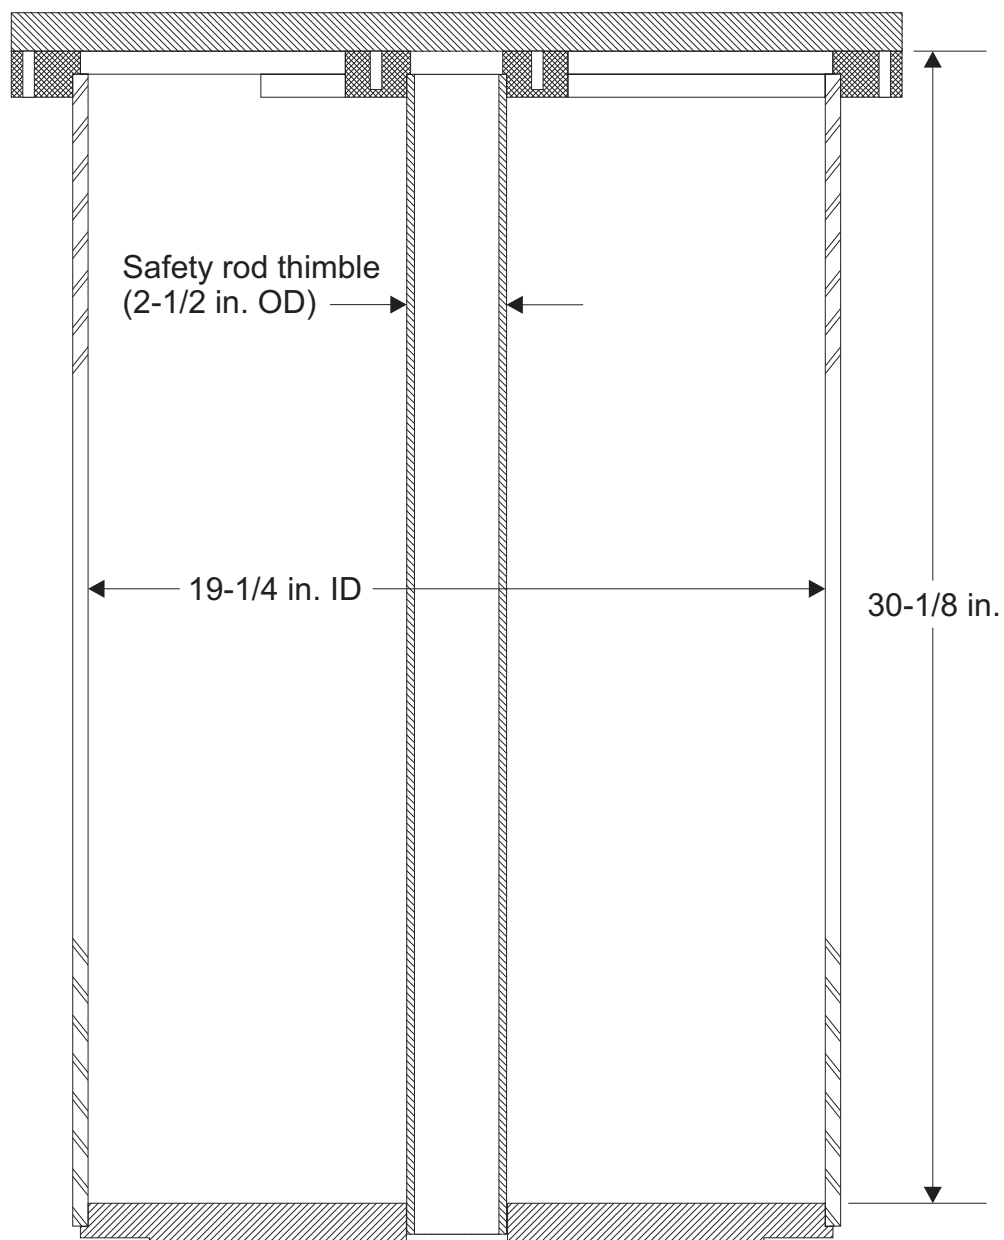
SHEBA-II Critical Assembly Vessel (CAV).
